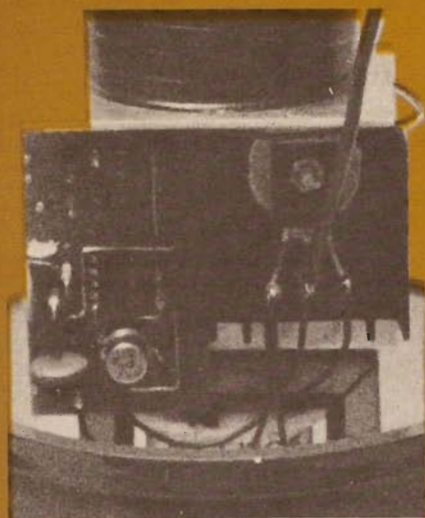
THE ION-GENERATOR circuit is built on a small piece of circuit board. Transistor Q2 is mounted next to the board and should be heat-sinked as shown.
